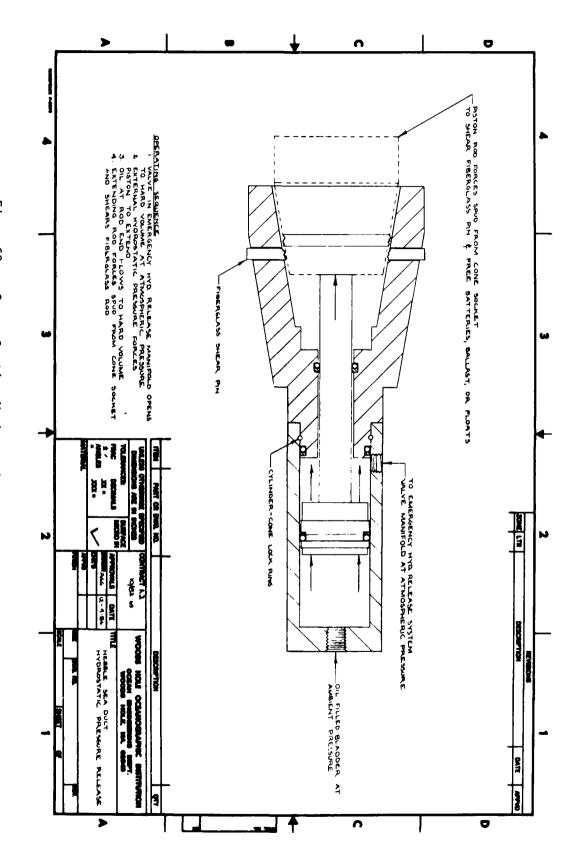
Cross Section Mechanical Shear Pin/Cone Assembly.
